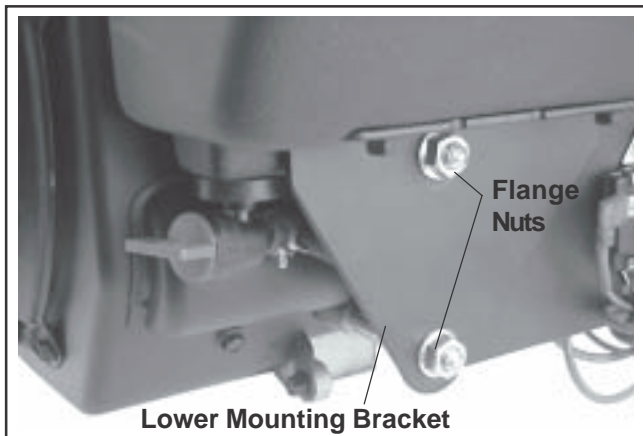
Installing Fuel Tank Lower Mounting Flange Nuts.
